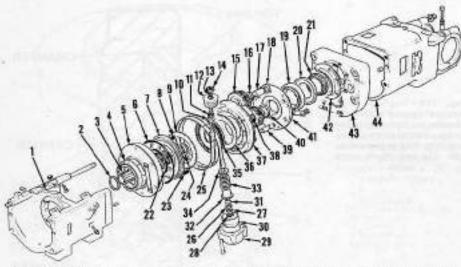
Exploded view of rear planetary assembly of power shift transmission. See Fig. 162 for view of front planetary essembly.
